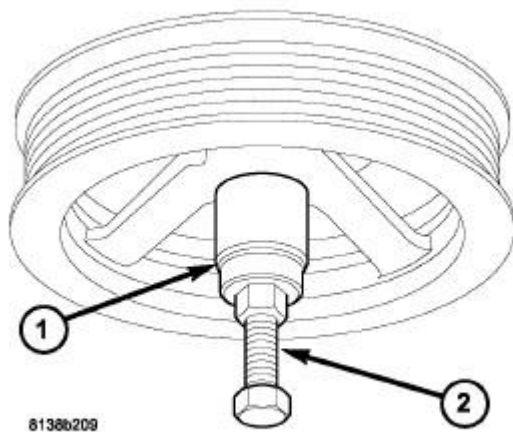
CRANKSHAFT DAMPER - INSTALLATION
